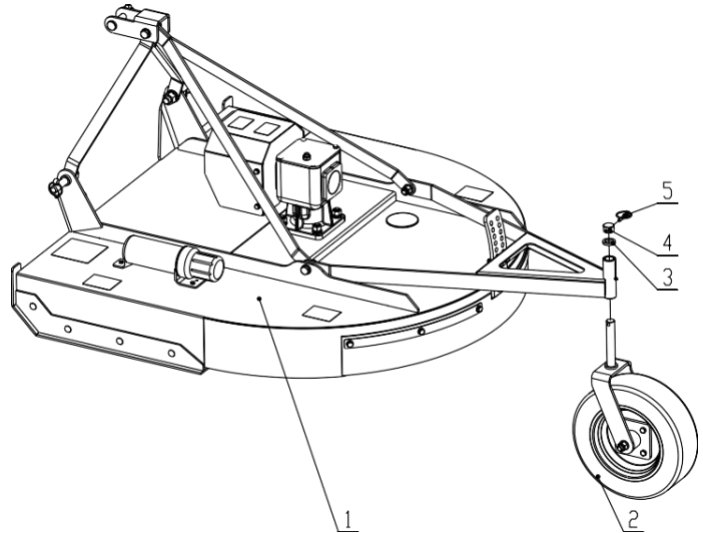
Installing Wheel Tire Assembly and Fittings
